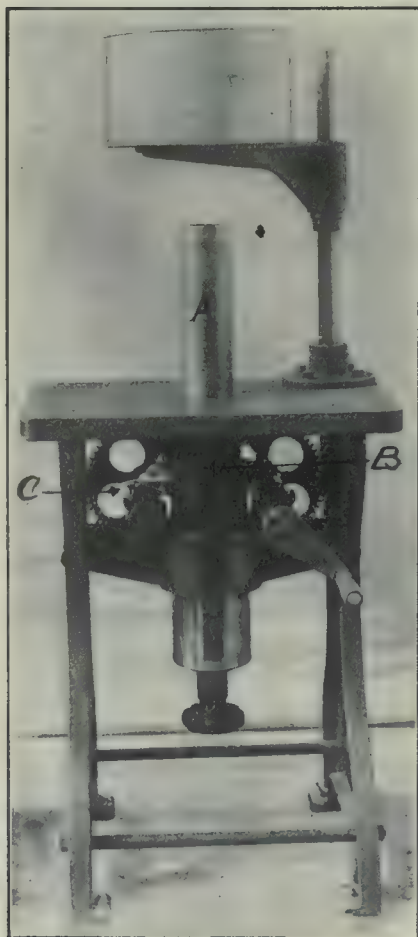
Wadsworth Moulding Machine Showing Mechanism.
